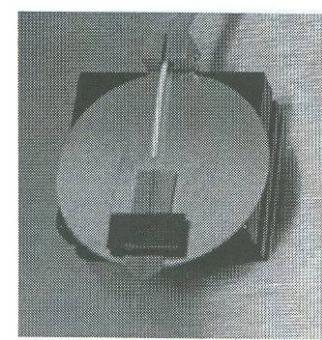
Optical fiber mounting over silicon fixtures assembled to nano/micro positioner devices.
